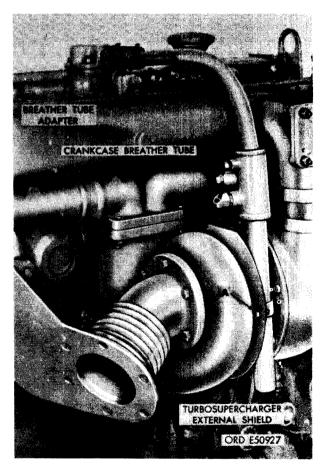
REMOVING OR INSTALLING CRANKCASE BREATHER TUBE (EARLY MODEL ENGINES).
